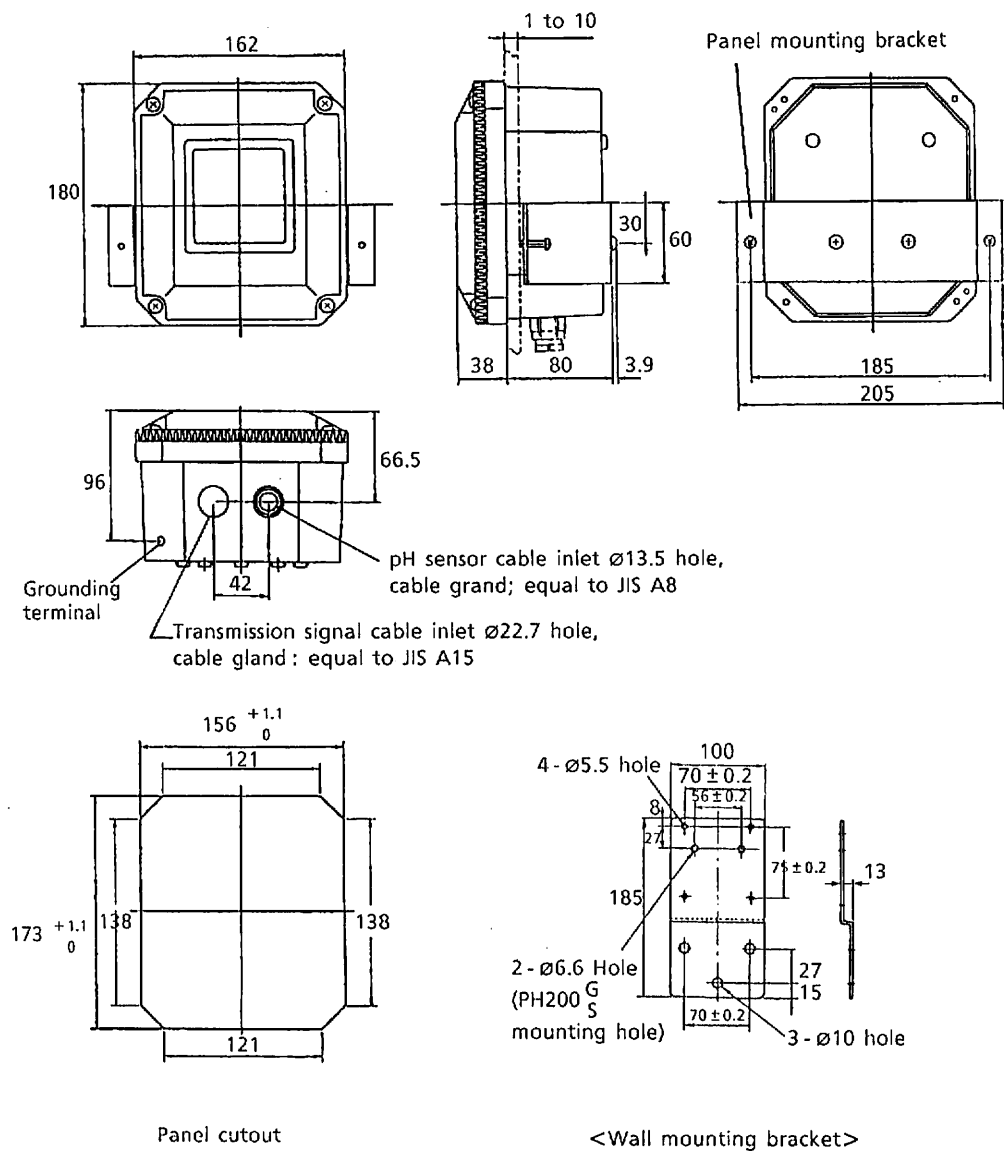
Dimensional Outline Drawing of Intelligent 2-wire pH Transmitter
